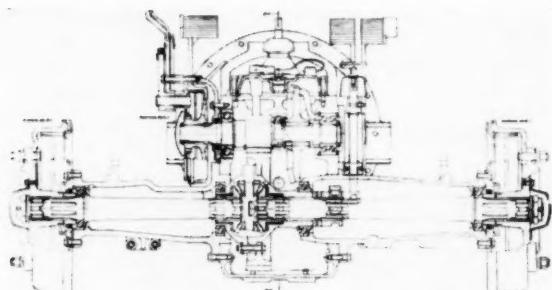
Differential and final drive, straight-through axles of ZF transmission (Friedrichshafen Gear Works)
